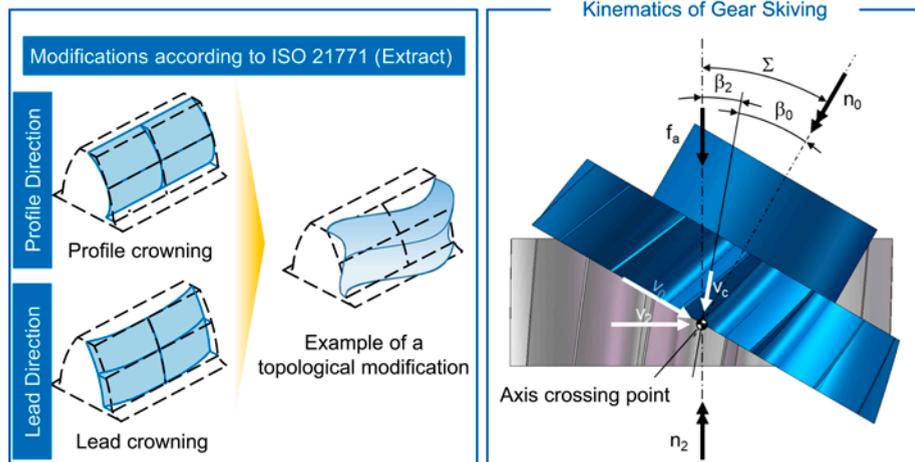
Flank modifications and gear skiving kinematics (Refs. 14, 11).
